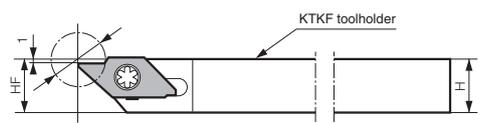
When a TKF-AS/-ASR insert is attached (The cutting edge is 1mm lower than the center line)
